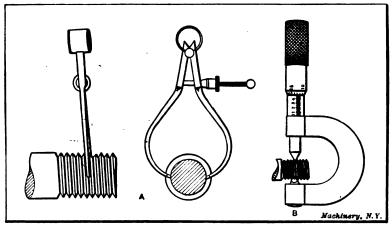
Testing Diameter of Thread with Calipers and Micrometer
